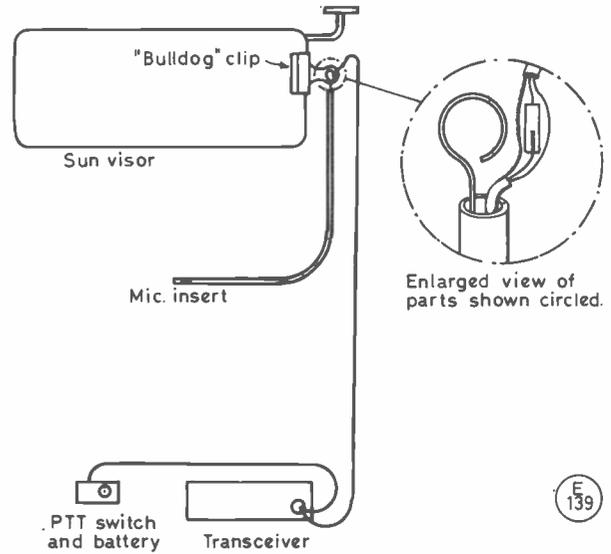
GENERAL LAYOUT AND CONSTRUCTIONAL DETAILS.
